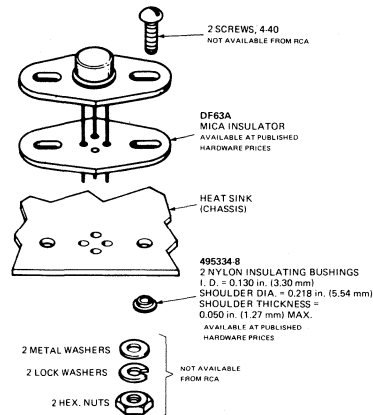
Suggested mounting hardware for types 40347V2, 40348V2 and 40349V2 (JEDEC TO-5 with mounting flange).
